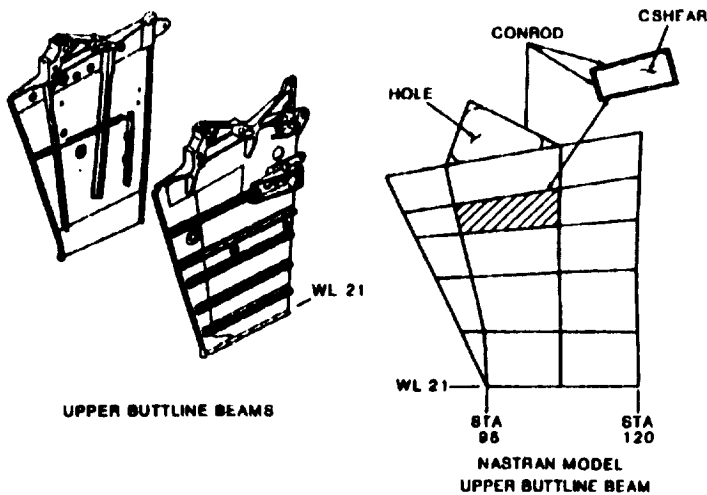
Static Modeling Guides - Bulkheads, Decks, and Butt-Line Beams
